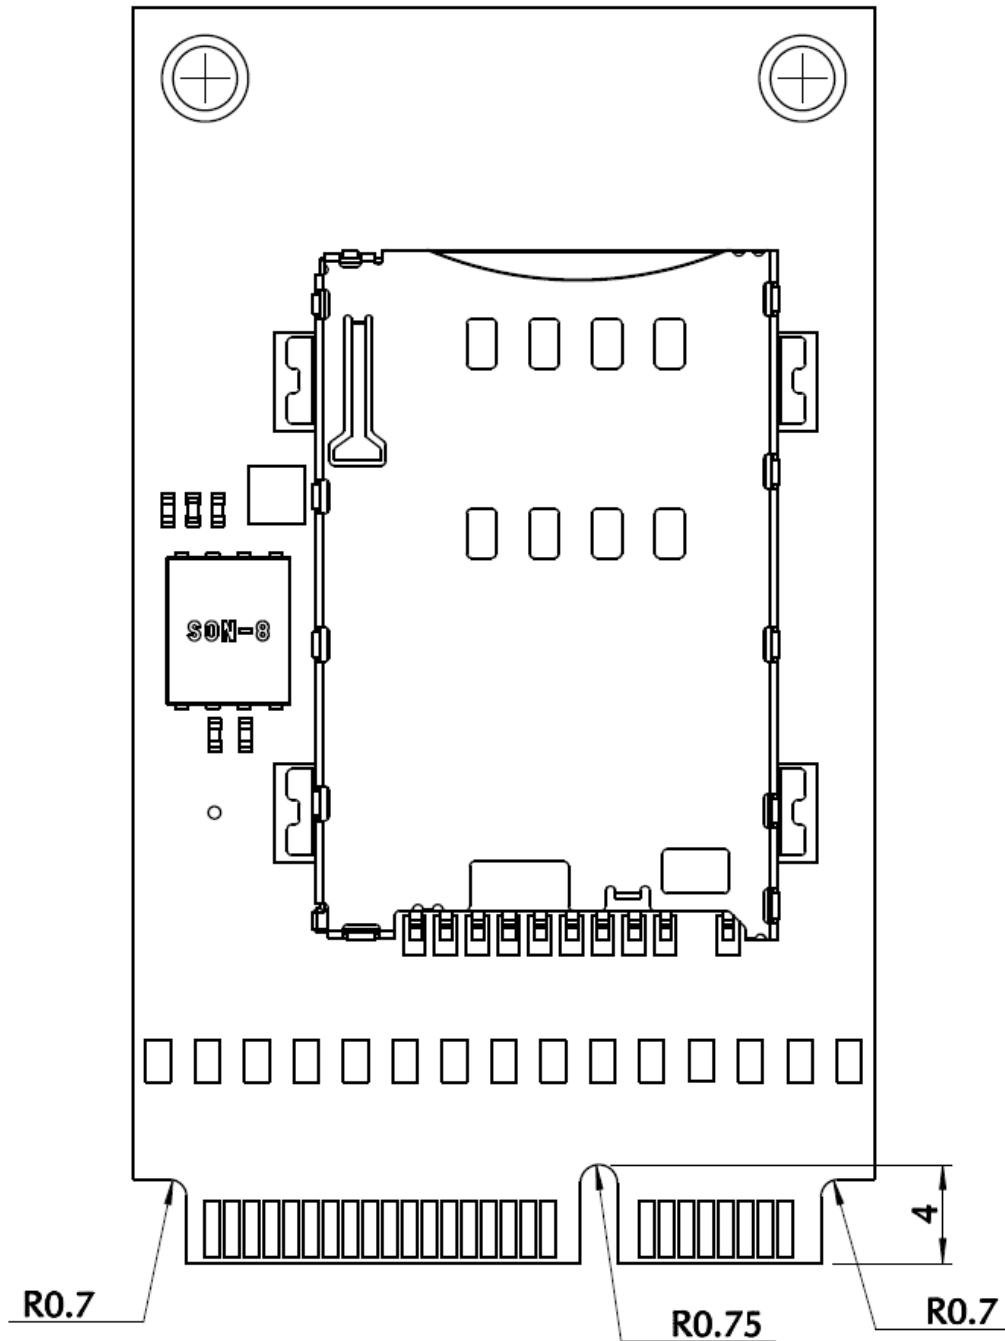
LE910Cx-mPCIe (with SIM Holder) Mechanical Bottom View
